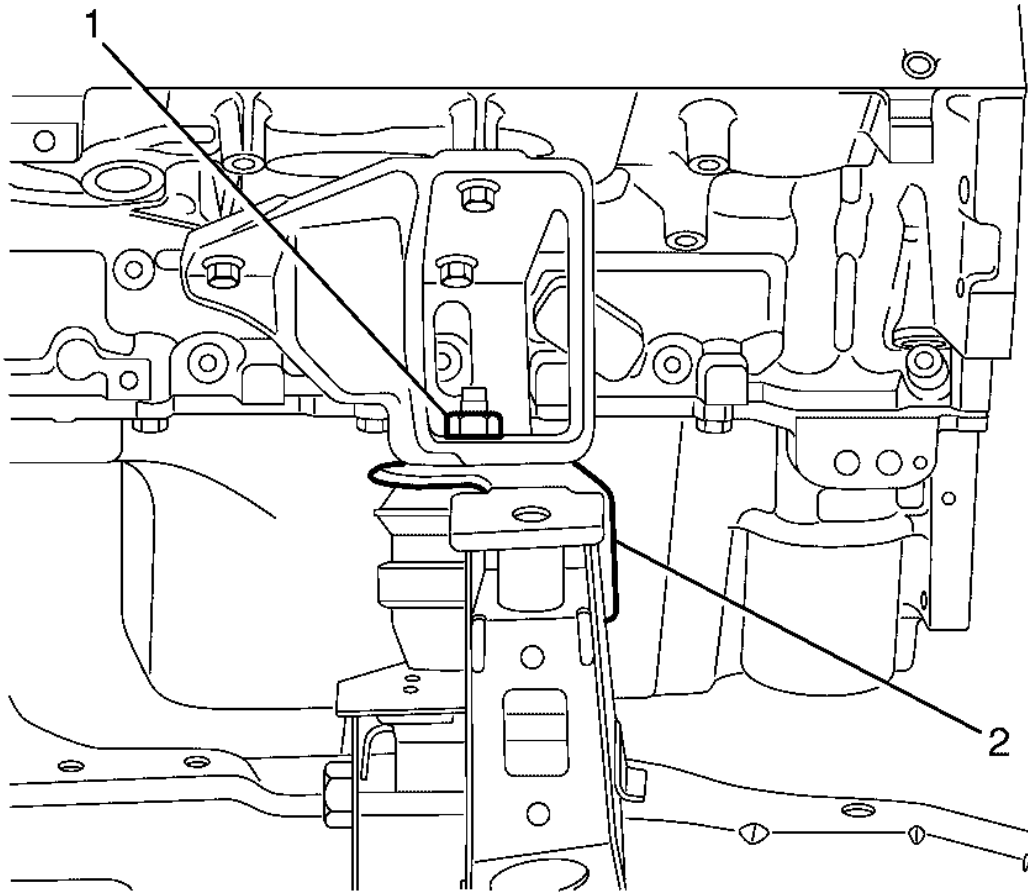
Identifying Left Side Engine Mount To Engine Mount Bracket Retaining Nut
